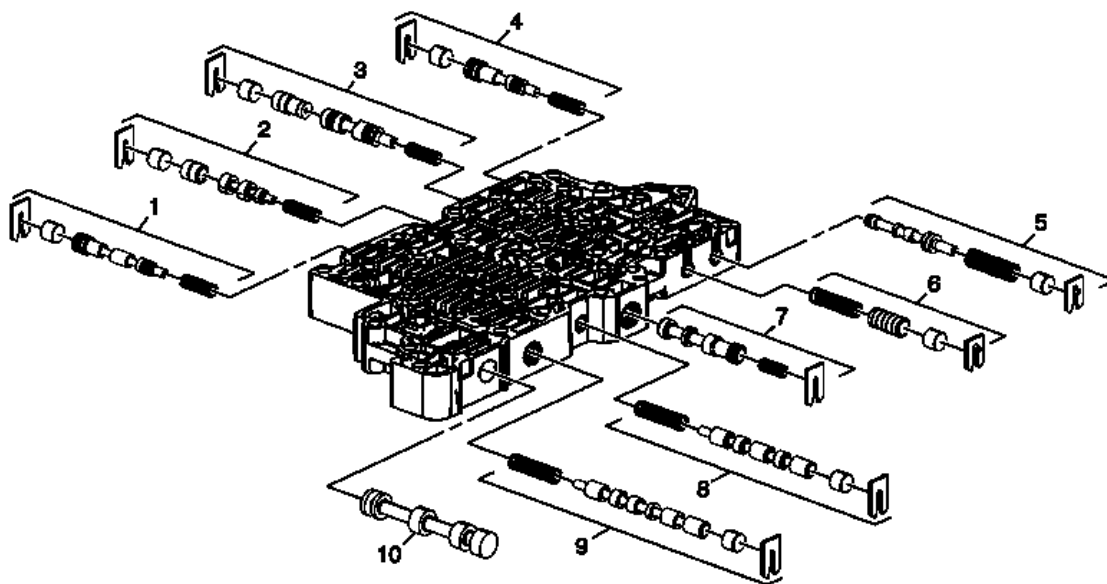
Control Valve Upper Body Assembly Cleaning and Inspection Components
